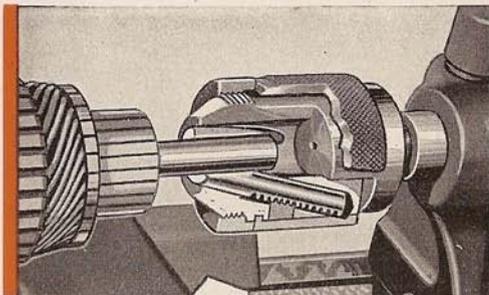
Cross Section of Armature Support Bushing for Mounting Centerless Armature Shafts in Lathe.
